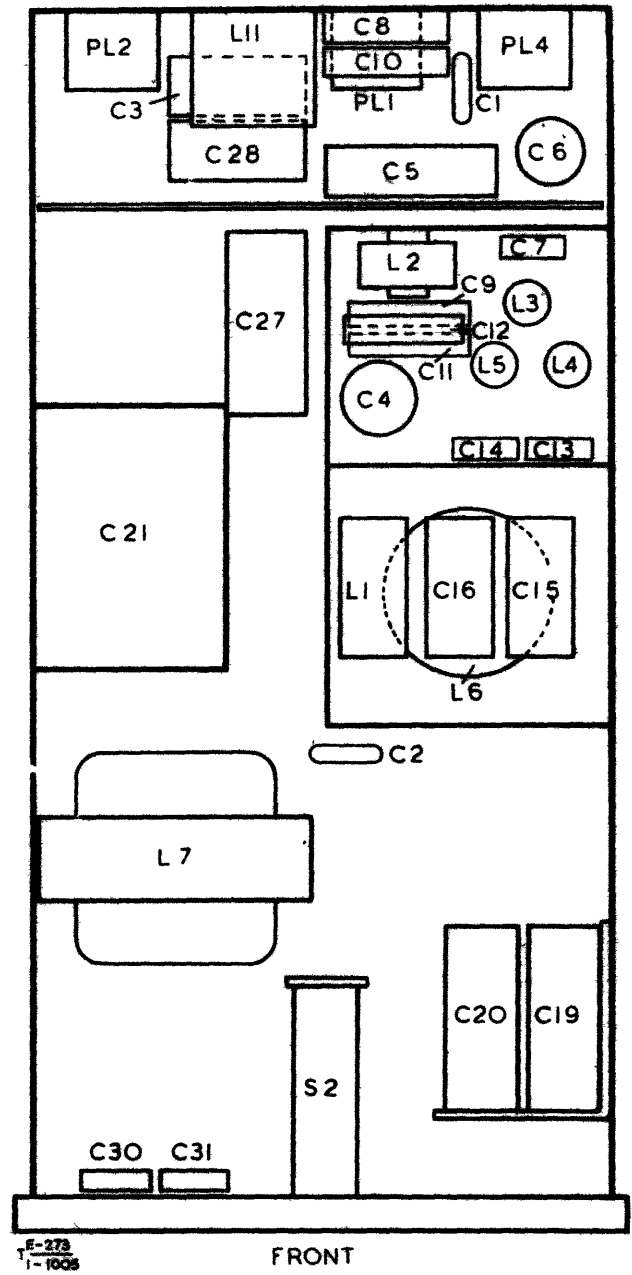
P.S.U. No. 33 <sup>BELOW</sup> ~~above~~ chassis component layout
